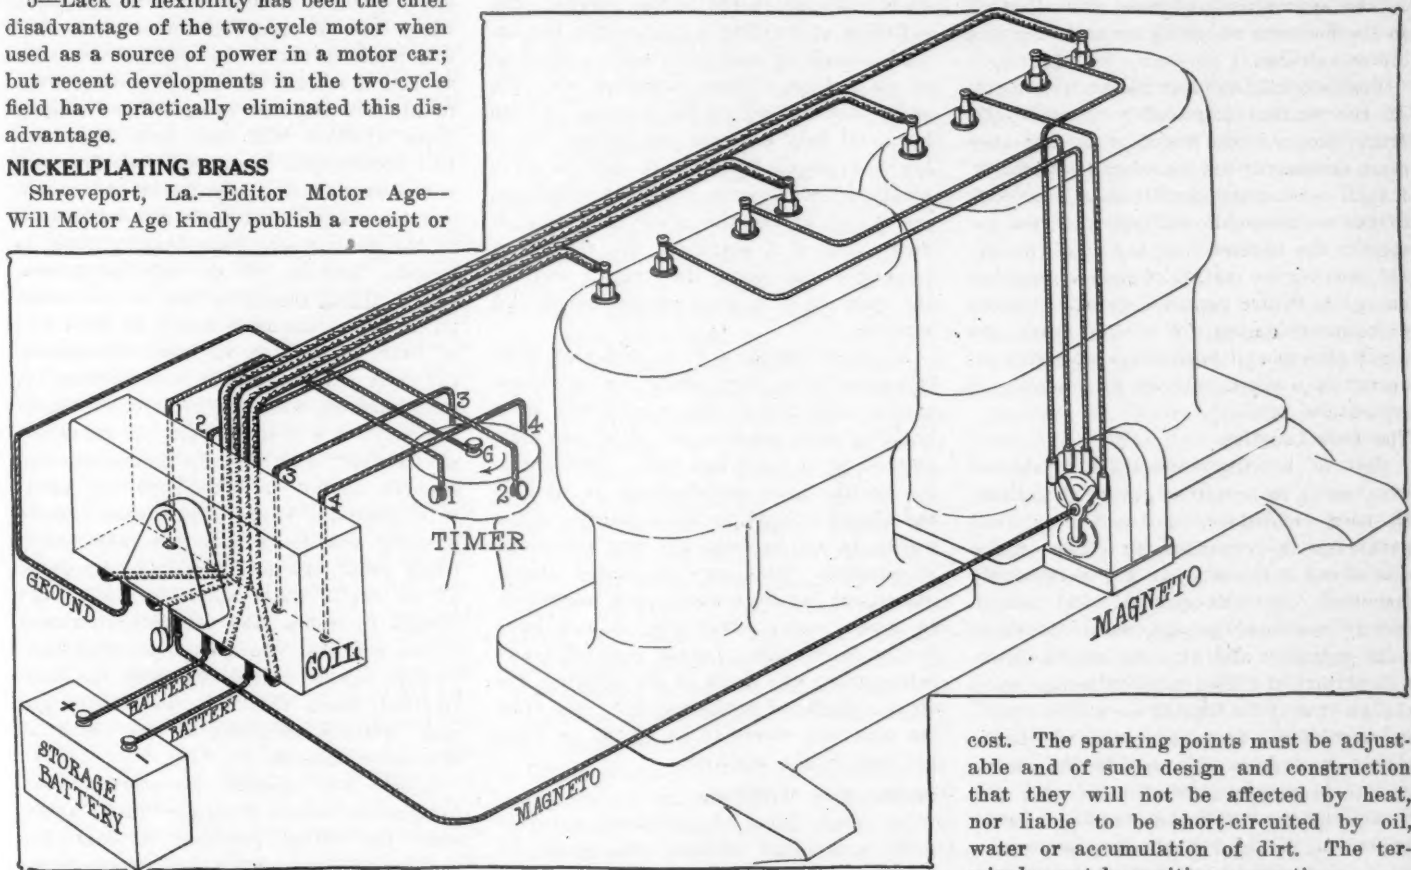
WIRING DIAGRAM OF SELDEN DOUBLE IGNITION SYSTEM
